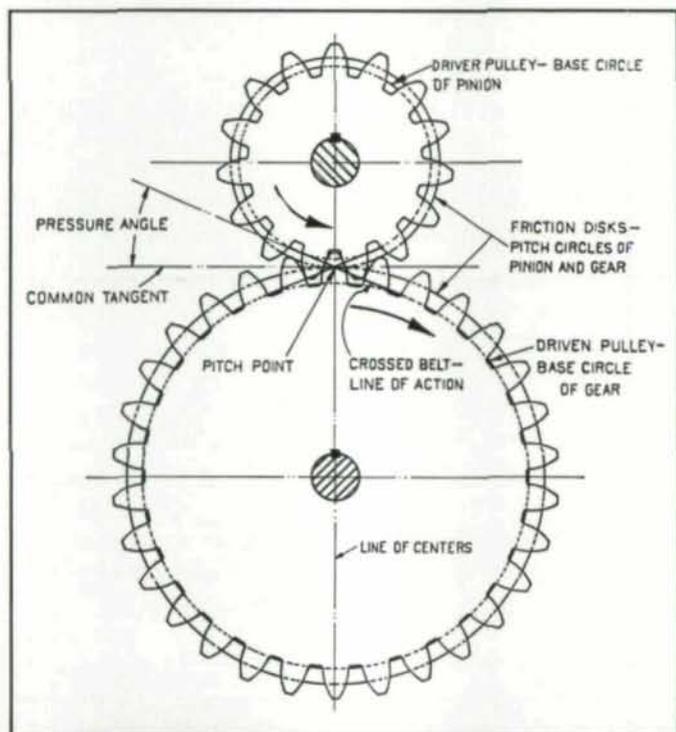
Diagram Showing Gears, Pulleys and Crossed Belt, Superimposed on Friction Disks, Illustrating Basic Gear Elements.
